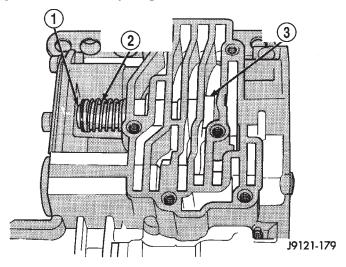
Shuttle Valve E-Clip And Secondary Spring
